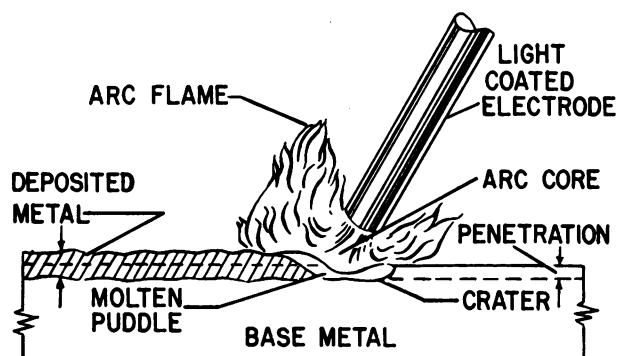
Molten metal transfer when welding with bare electrode.
